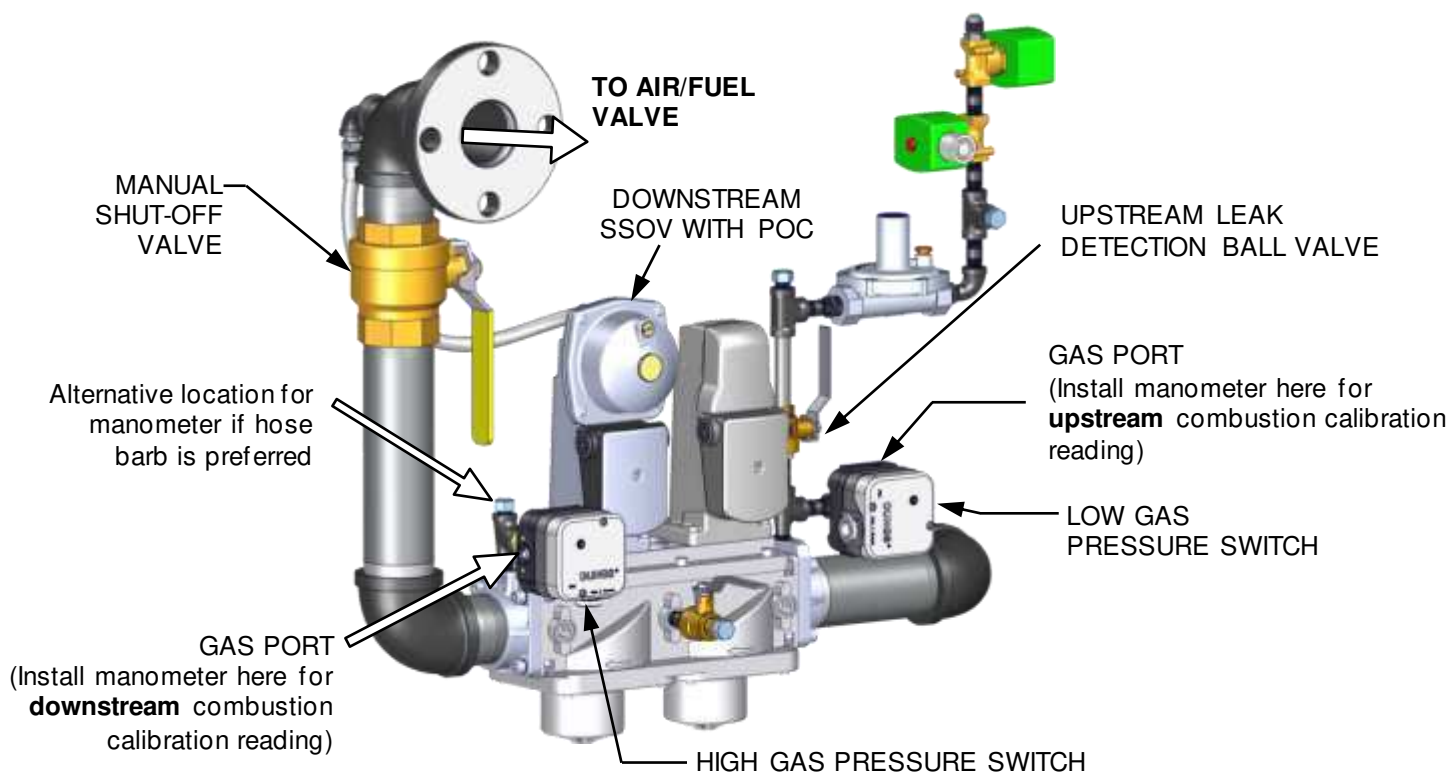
Port Location for Combustion Calibration – BMK5000-6000
